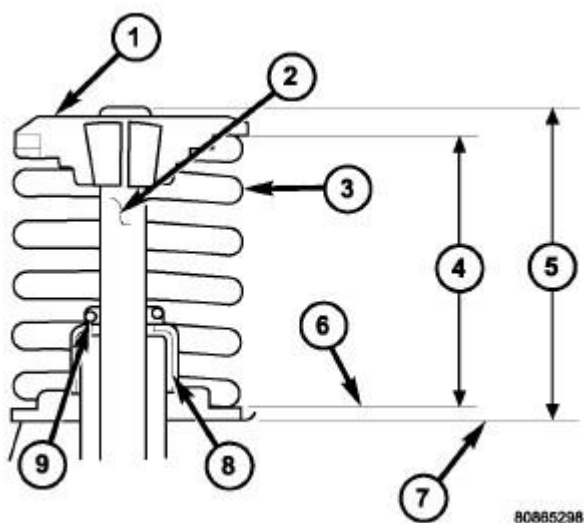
Valve Tip Height & Valve Spring Installed Height
